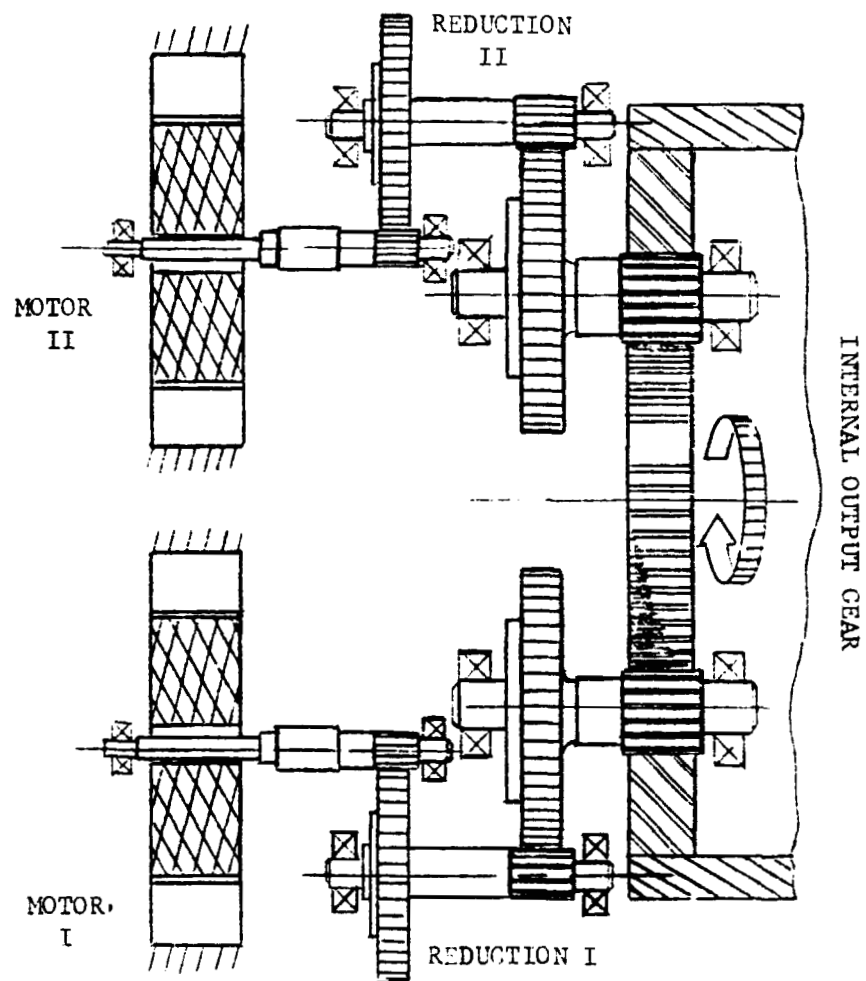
Dual Gear Train with Two Independent Motor Drives
